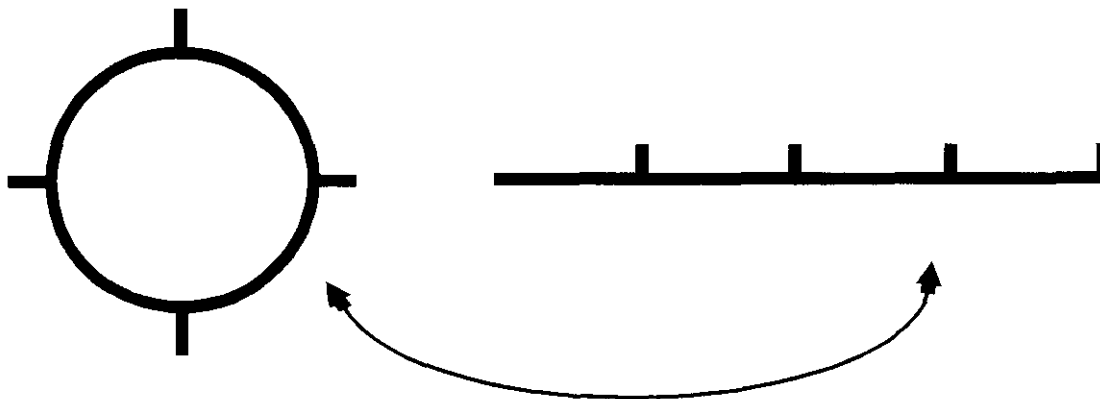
THE PRINCIPLE OF THE LARGE STRINGER-REINFORCED PANELS PRODUCED INTEGRALLY BY EXTRUSION
